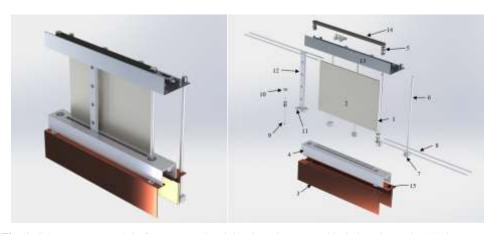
CAD concept model of an automatic wiping board: a) assembled view; b) exploded view.
